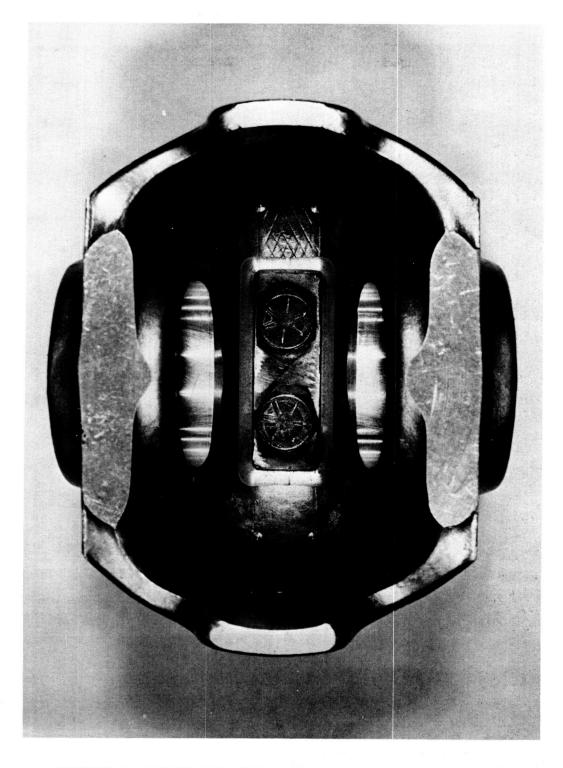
BOLTS AND SUPPORT PLATE USED TO ATTACH STEEL PISTON CROWN VIEW FROM PISTON BOTTOM
